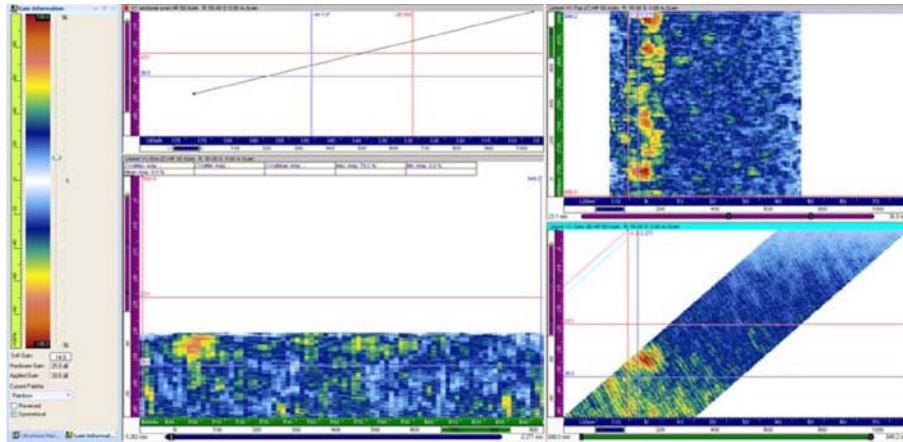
Specimen 9C-034 Flaw 1 Before Weld Crown Removal at 1.5 MHz, 45 Degrees with a Marginal Detection
